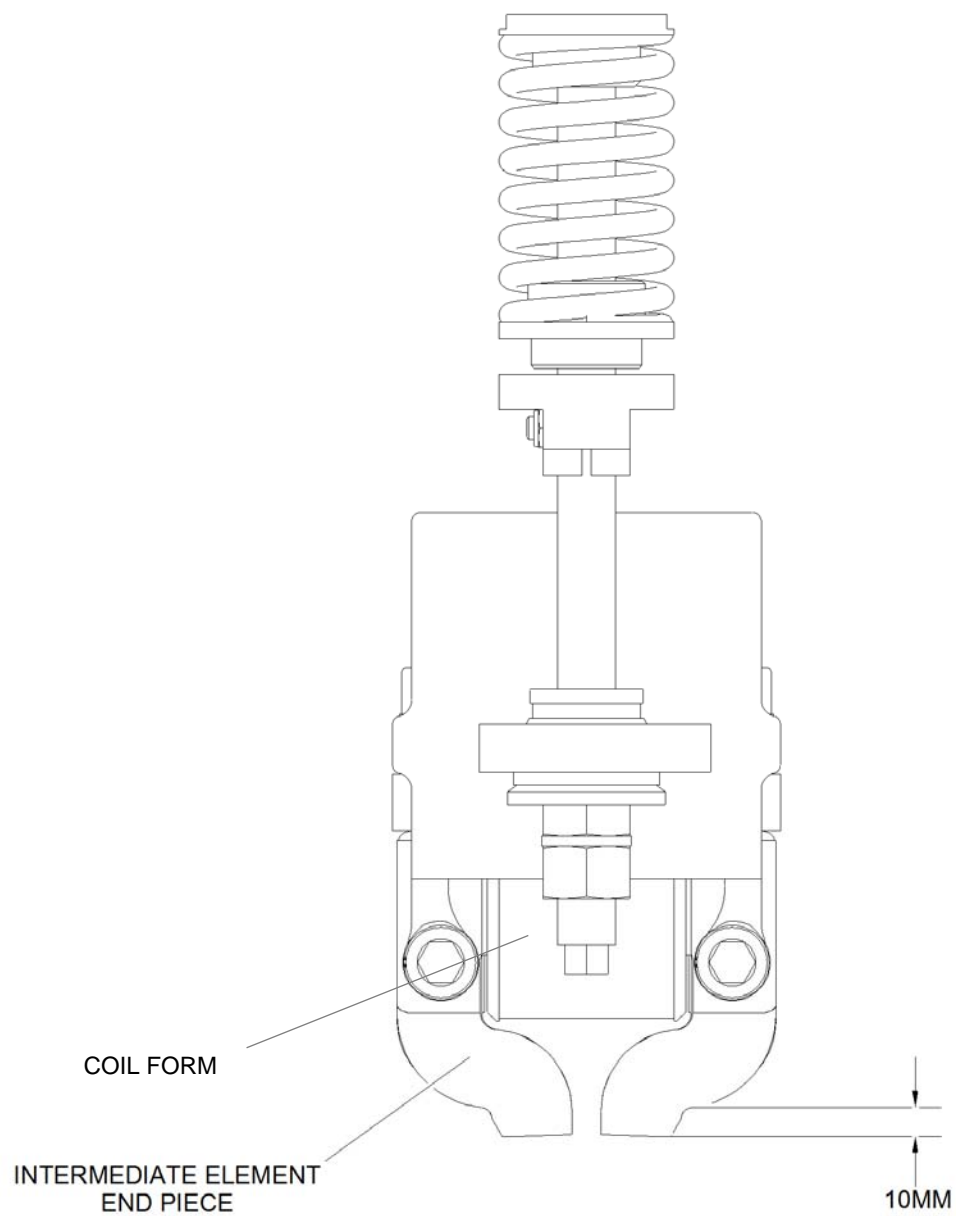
Intermediate Element/End Piece Wear Criteria
